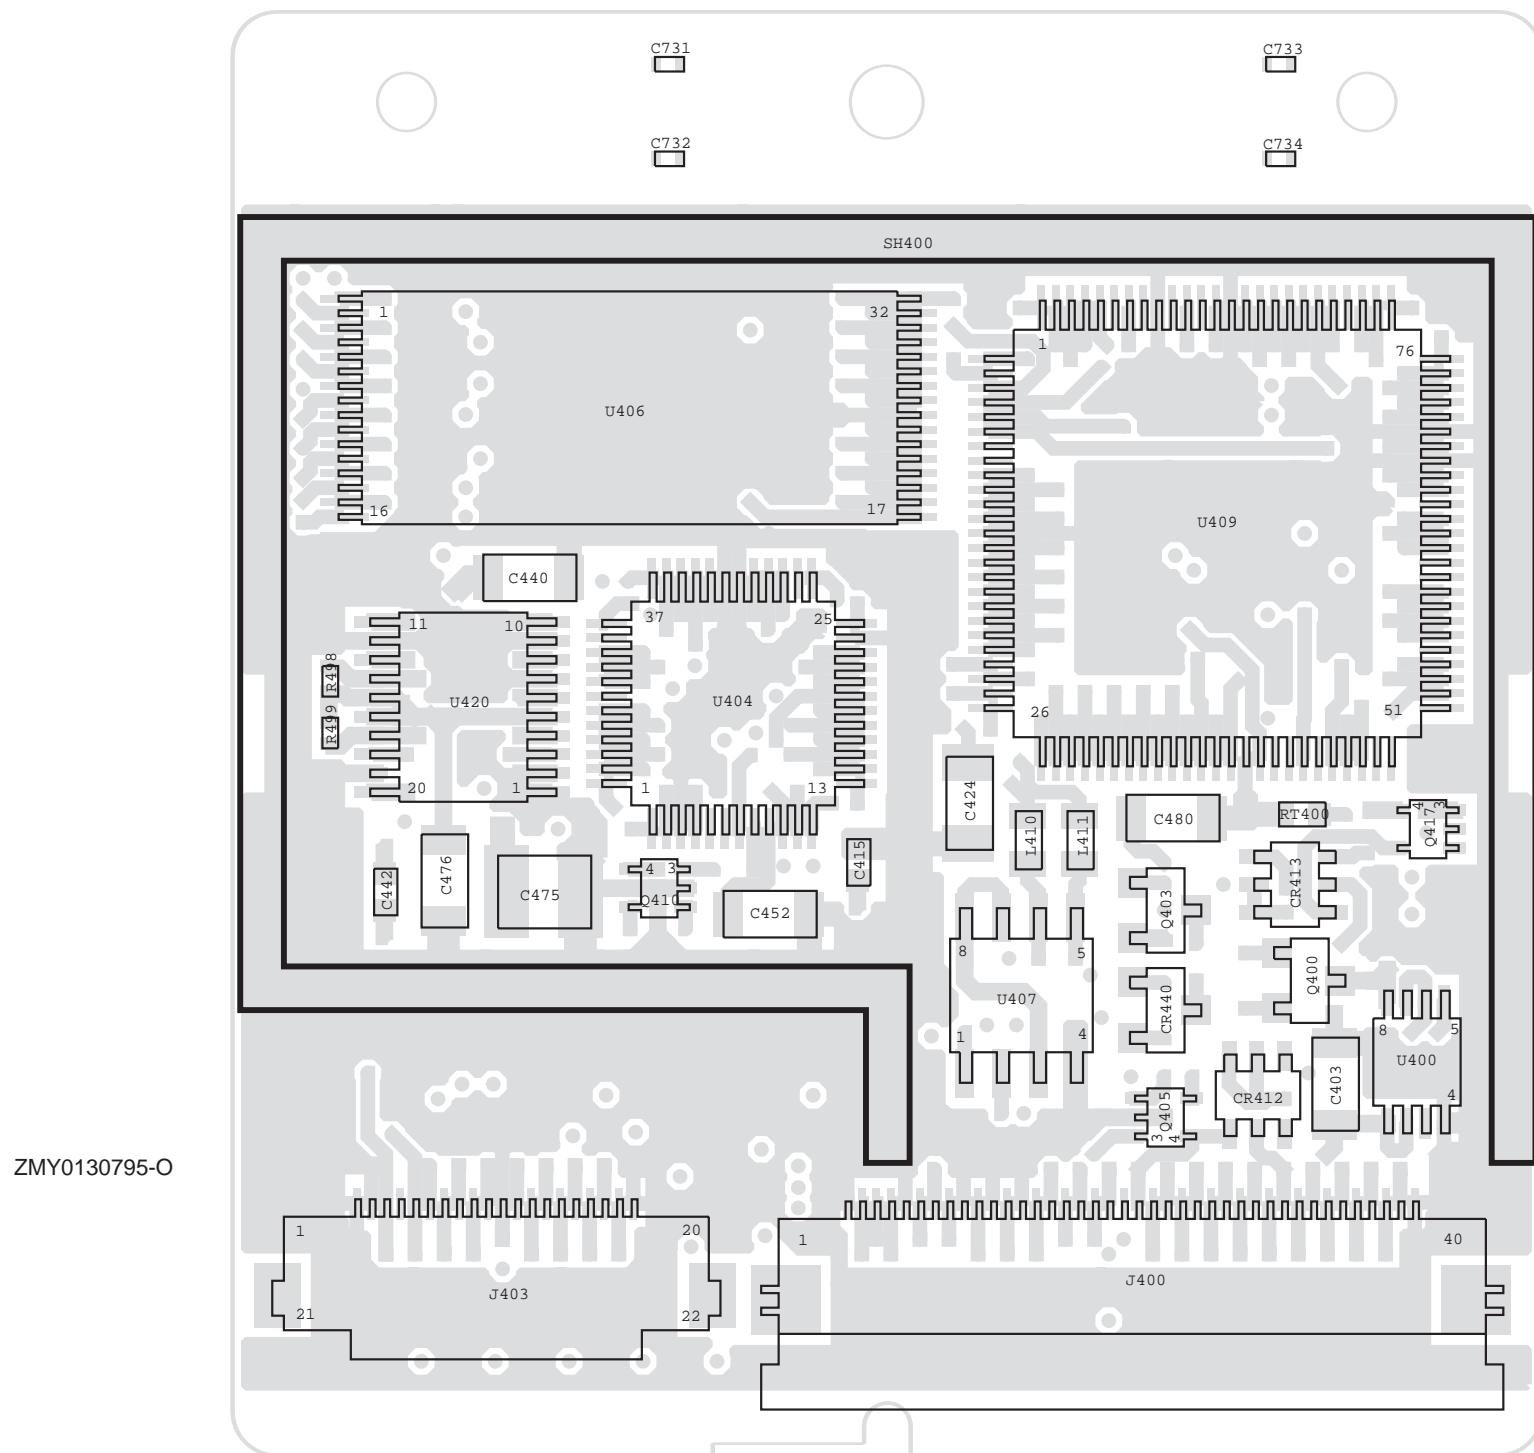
Controller Board Bottom View for (PCB No.8404056G07)
